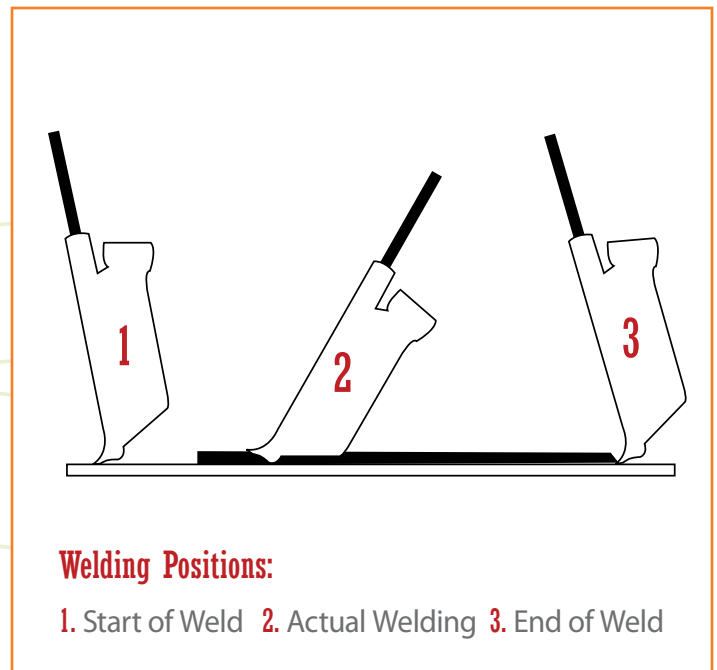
High-Speed Welding with round or triangular rod.
